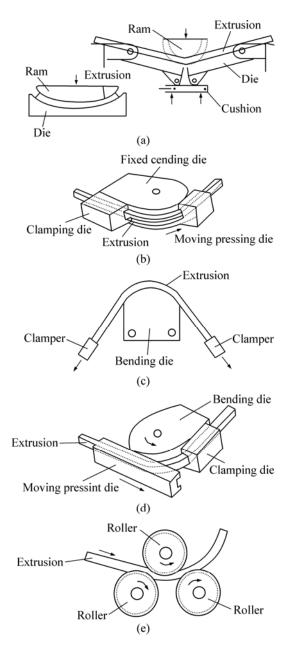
Some basic bending processes: (a) Press bending; (b) Compression bending; (c) Stretch forming; (d) Draw bending; (e) Roll bending
